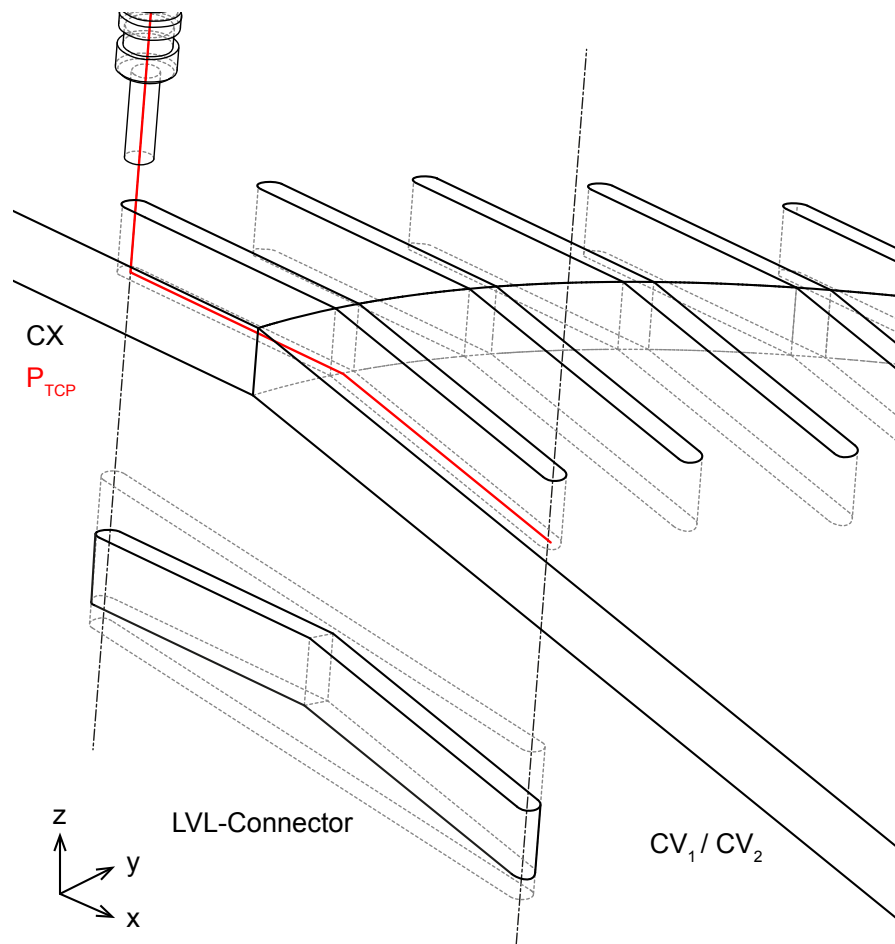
Schematic Drawing of the Connector Elements made from Cross-laminated LVL Panels - The slots have been cut with a 30 mm shank-type turn blade-knife cutter
